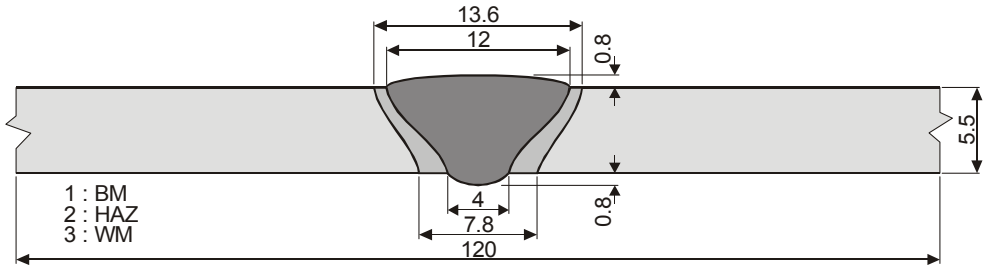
Cross-section of the gauge length of the welded pipeline.
